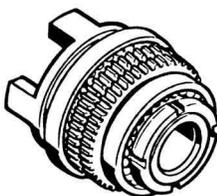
Secondary Drive Chain & Sprocket Removal
